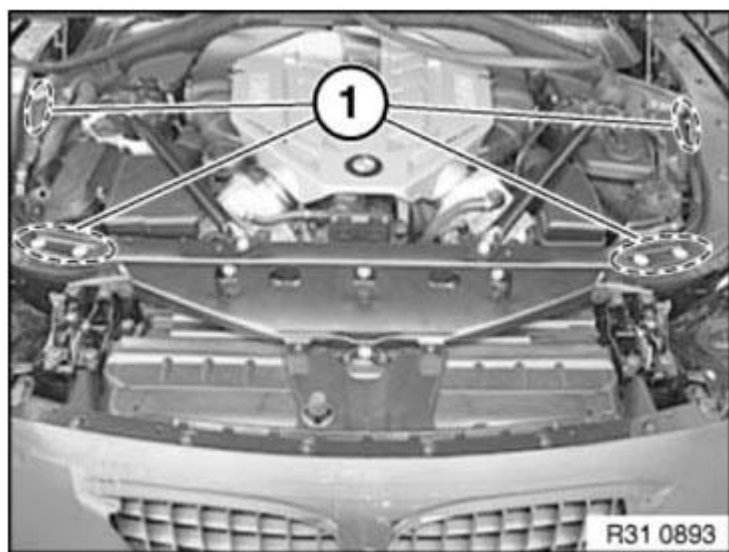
Identifying Contact Points Of Special Tool 00 6 050
